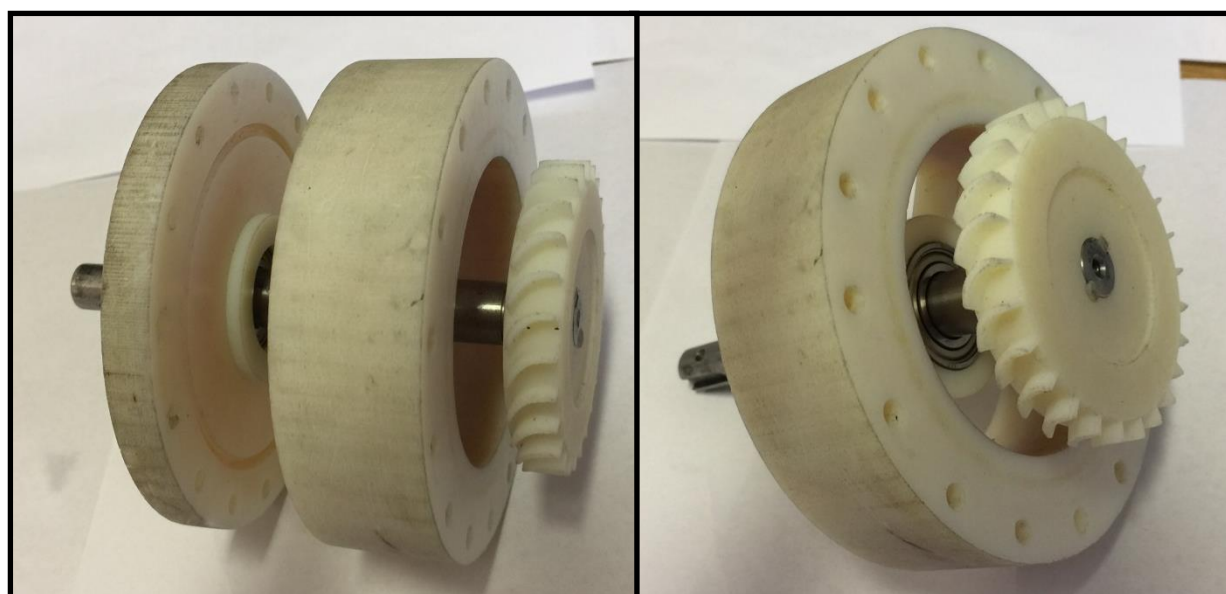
Pictures of manufactured rotors assembly with the shaft, bearing, rotor case and a closing end.
